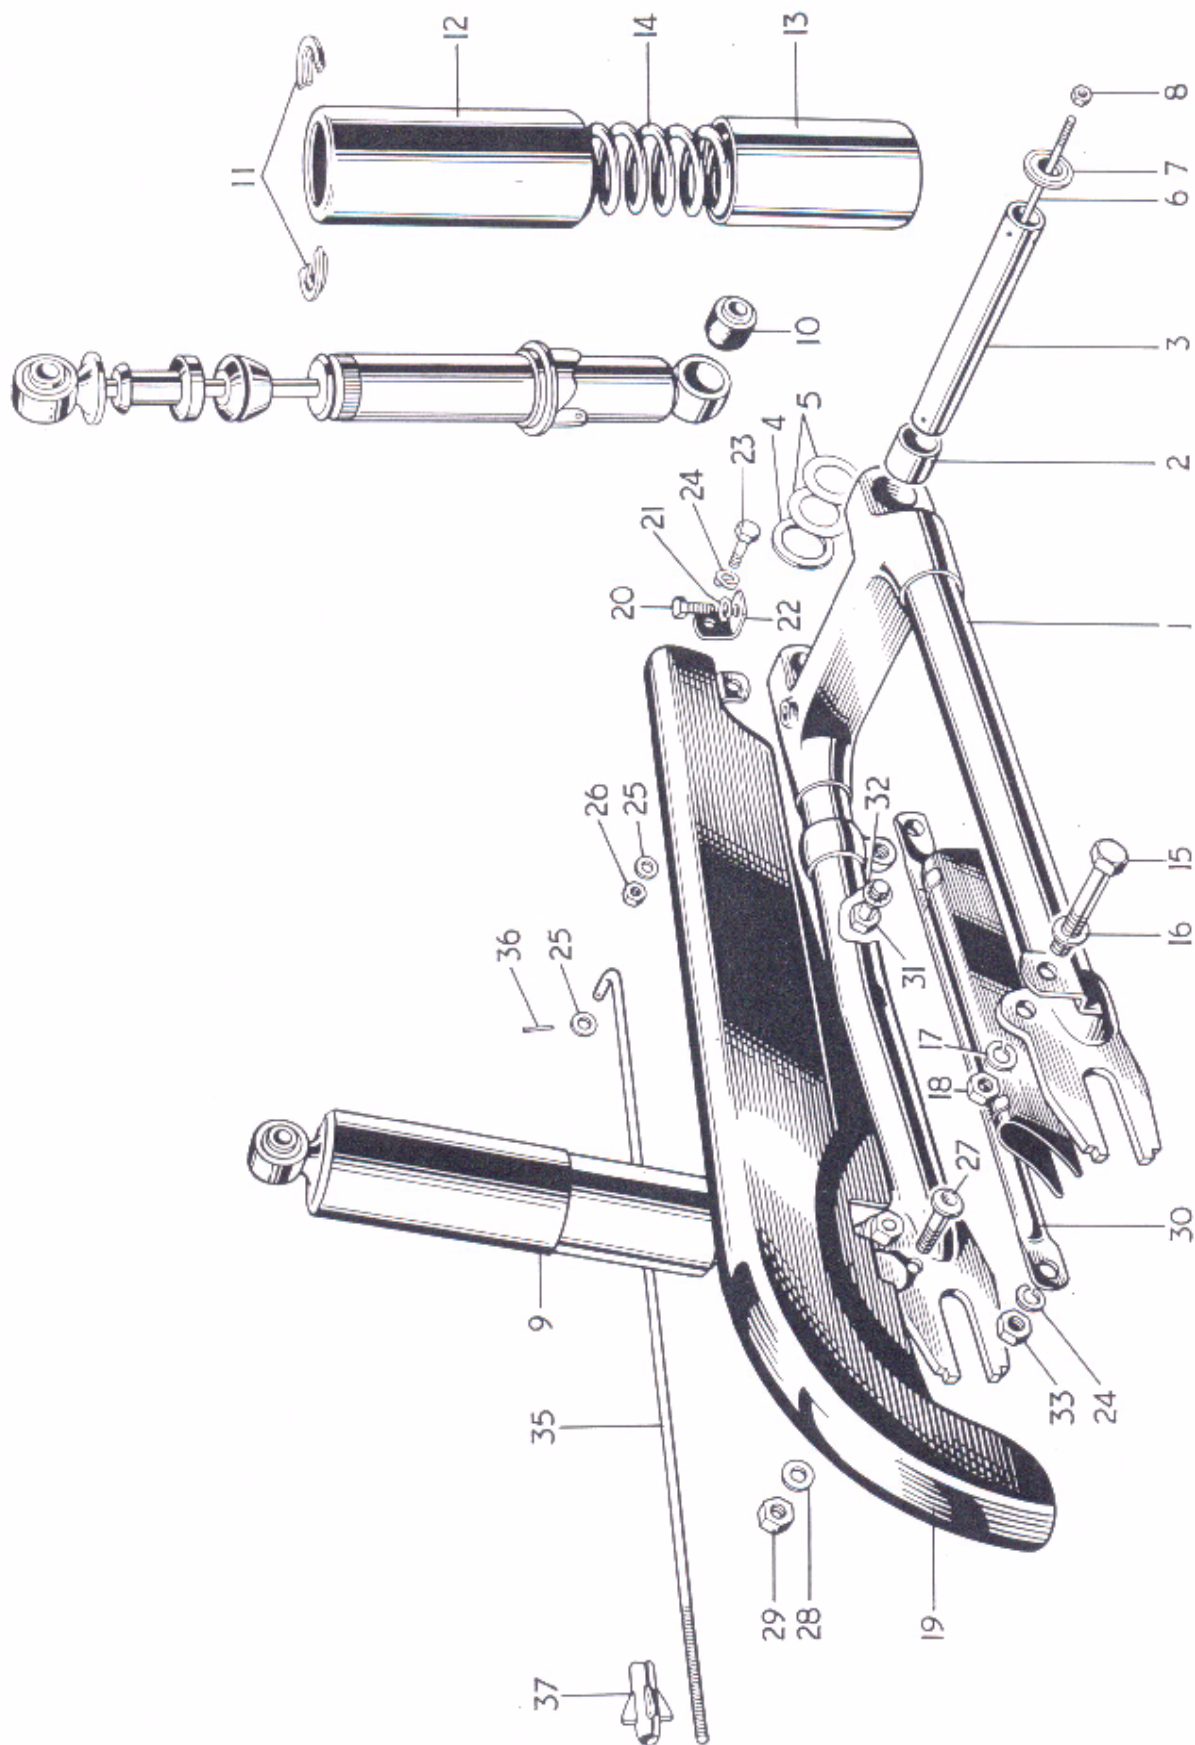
SWINGING FORK, SUSPENSION UNITS AND CHAINGUARD.
